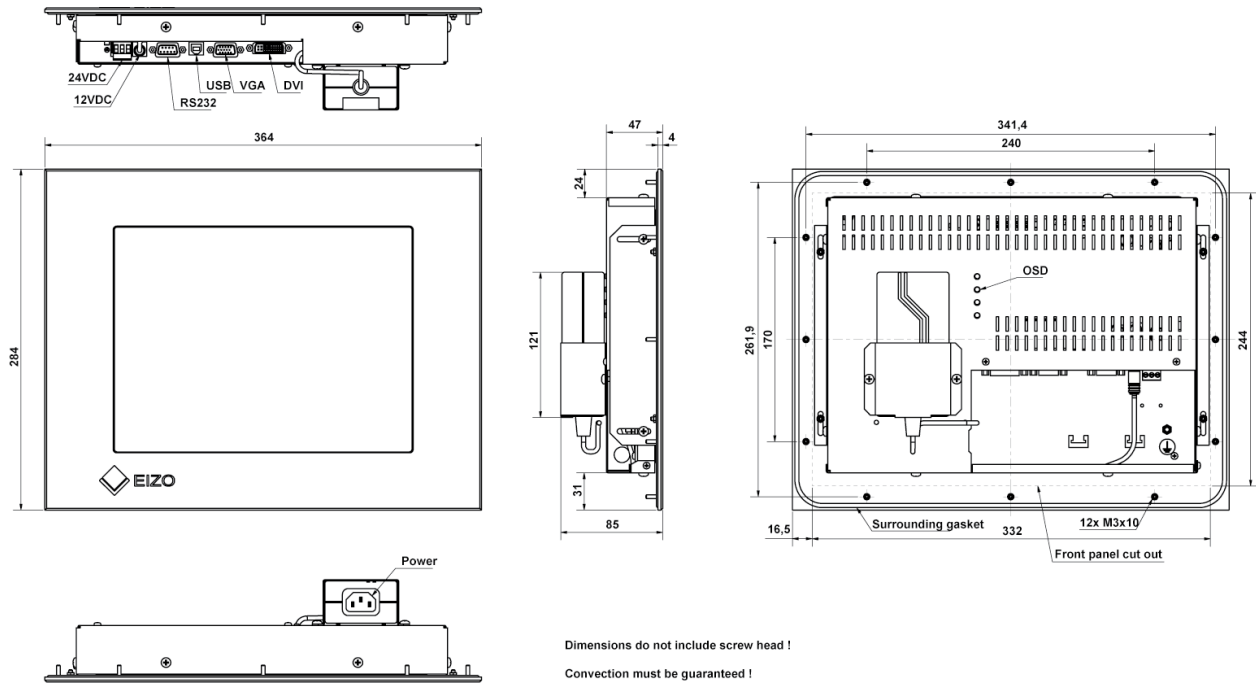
Dimensions of the DV1208-002 (with AC power supply)
